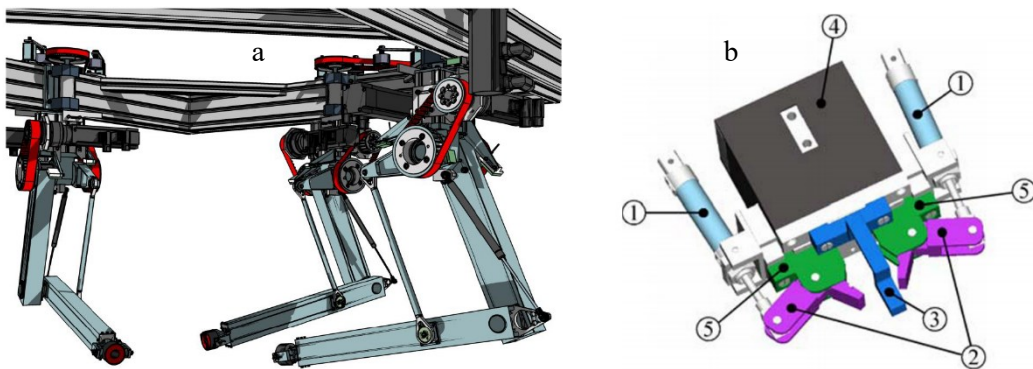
(a) Parallel Reconfigurable Gripper [65] (b) Multipurpose SPI3 Gripper [49]
